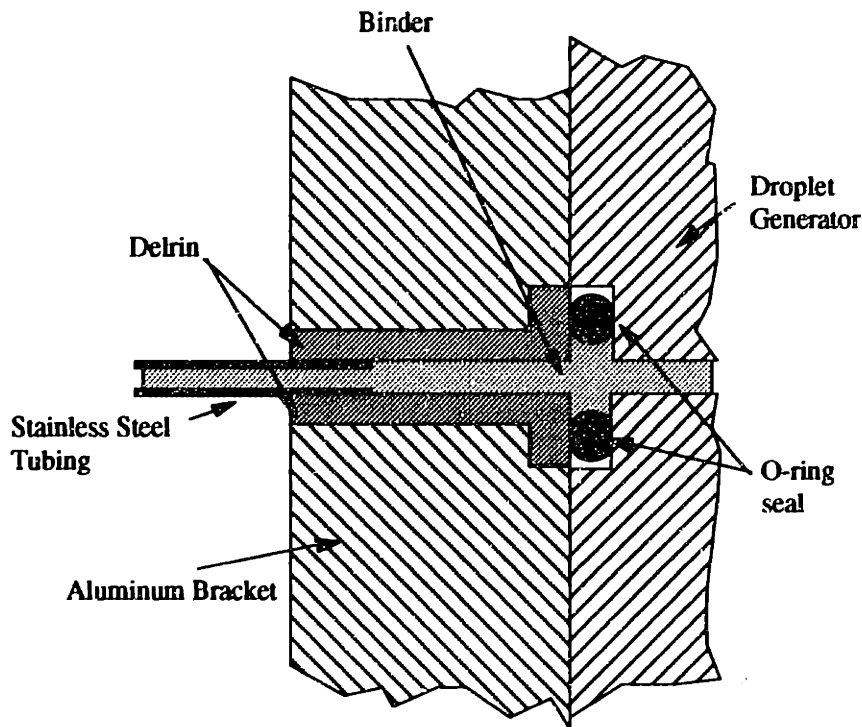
The fluid seal between the droplet generator and the aluminum support bracket. The aluminum bracket is not wetted with the jetted fluid.
